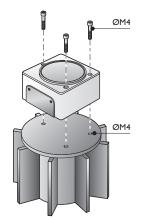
Heat sink, fixation through the module housing and not on the top surface of the housing.
